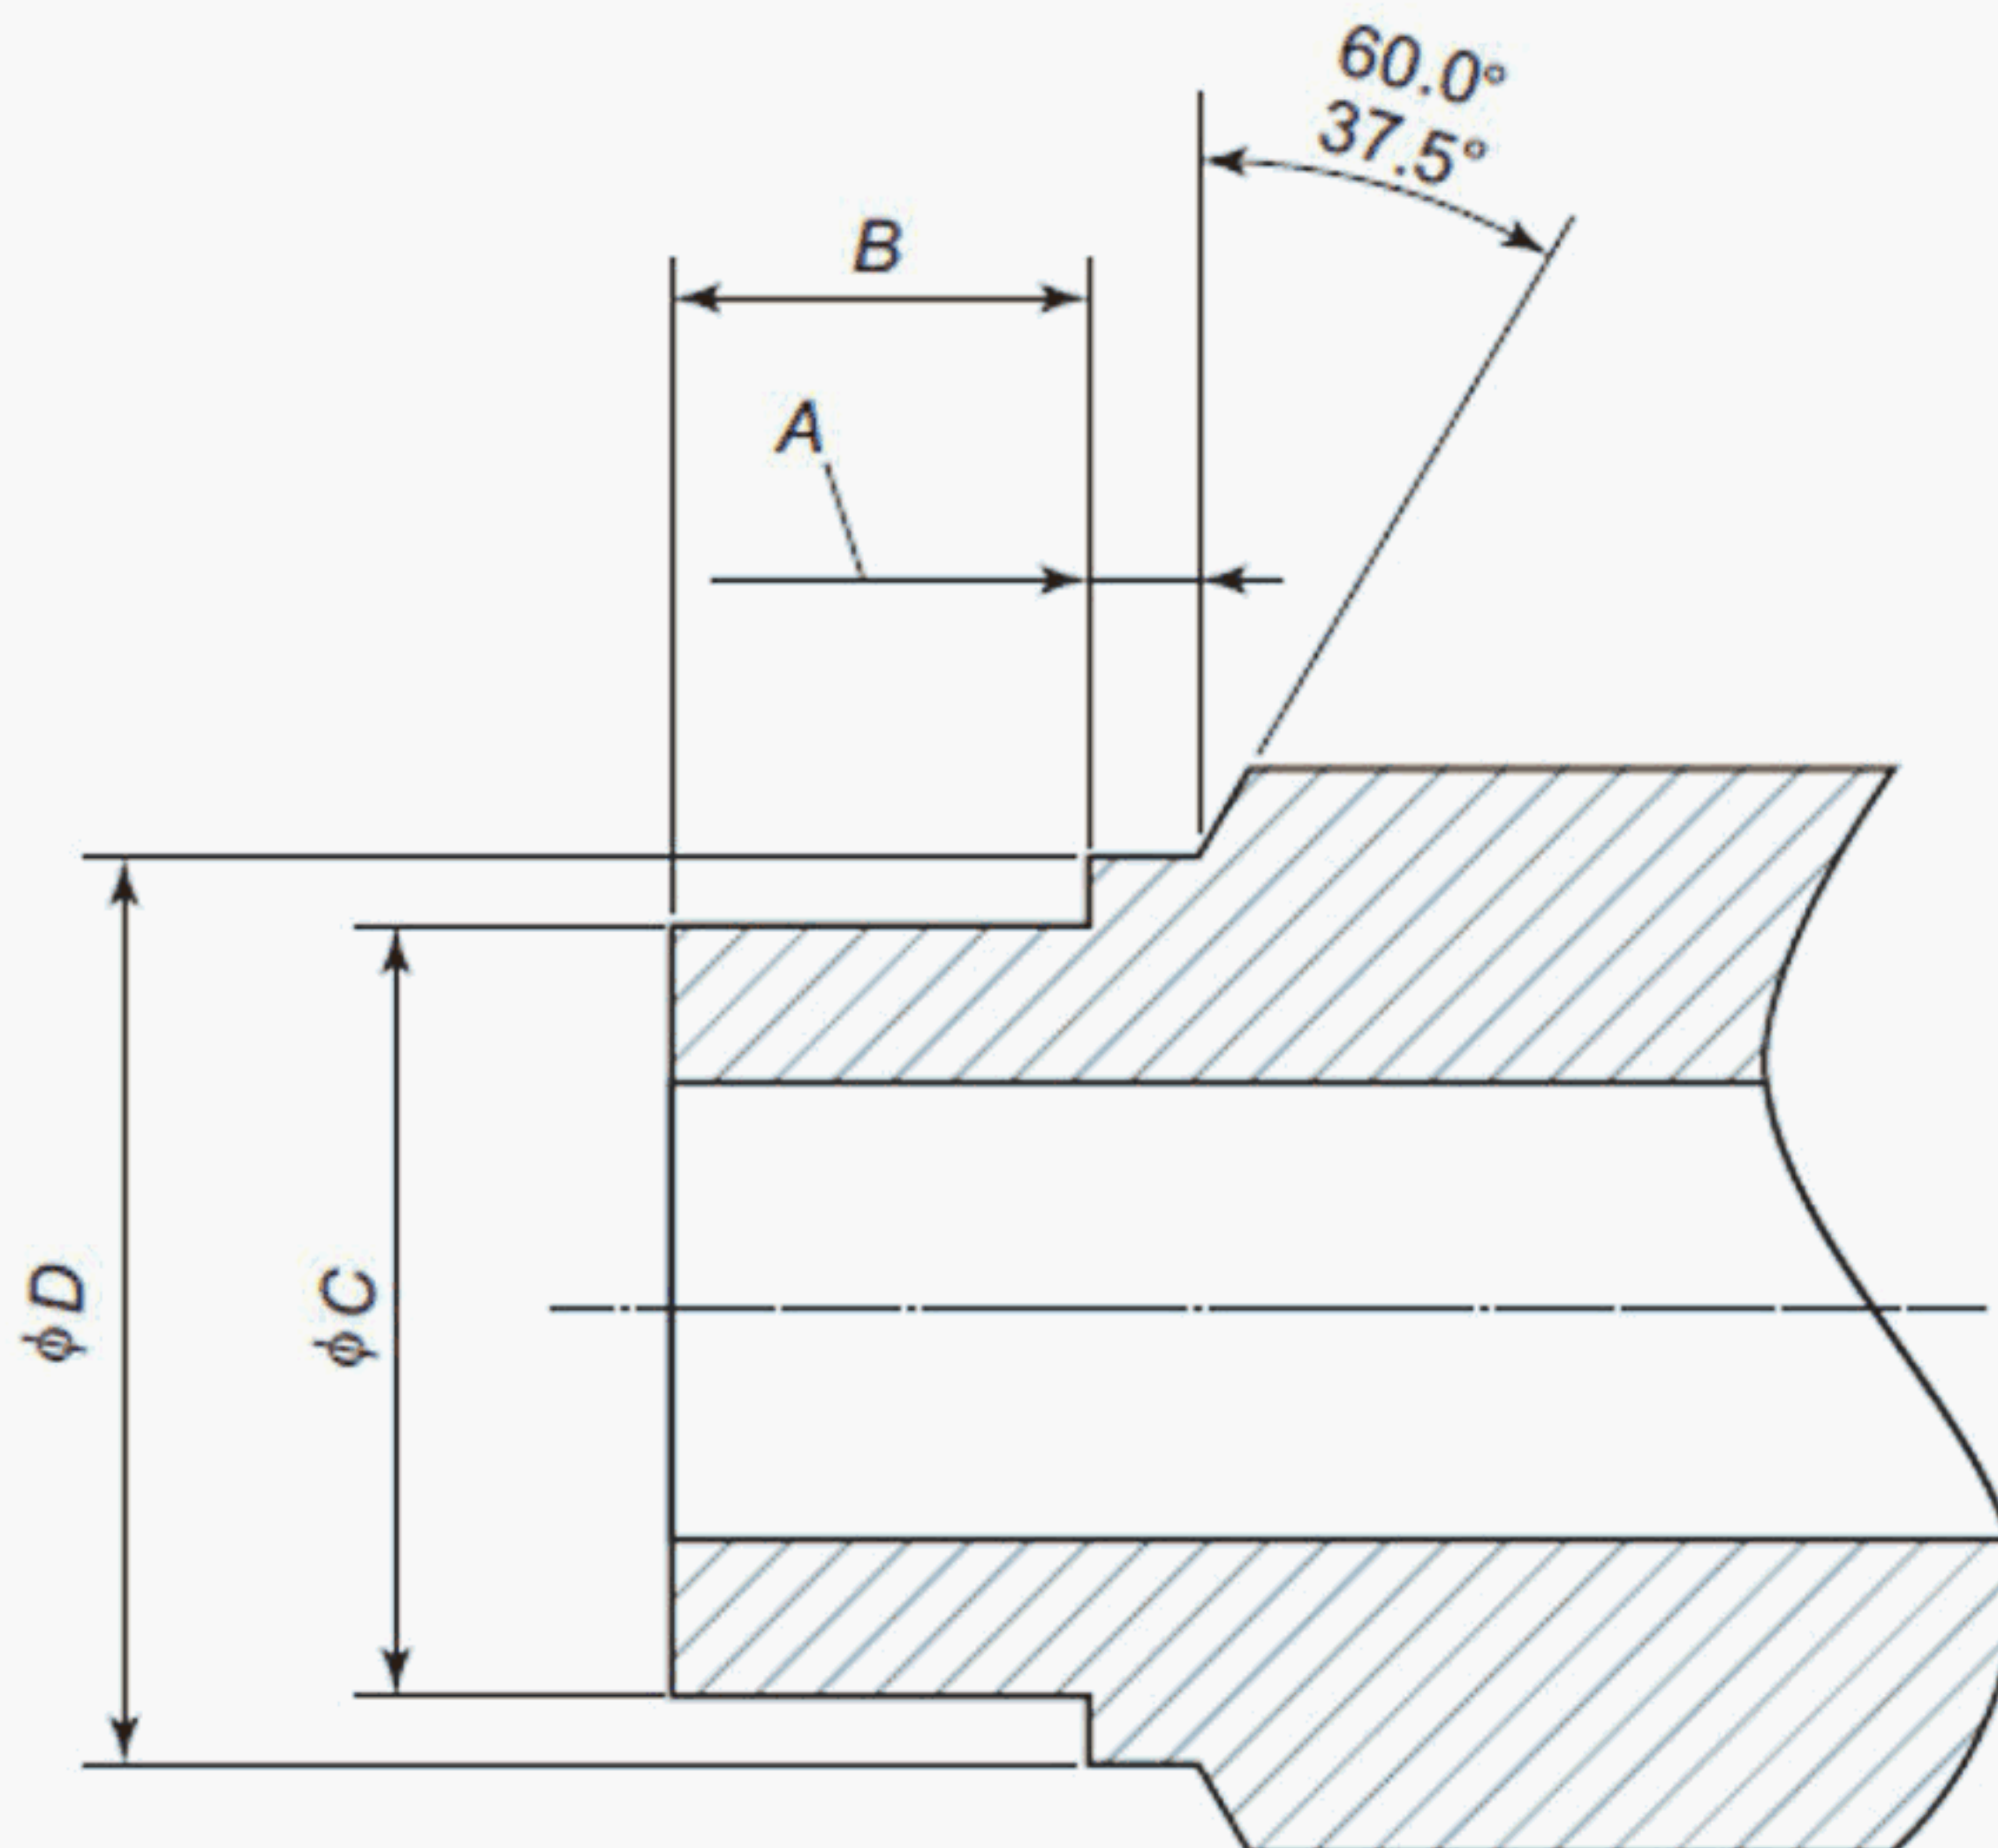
Socket Welding End Preparation for Class 800 and Class 1500
